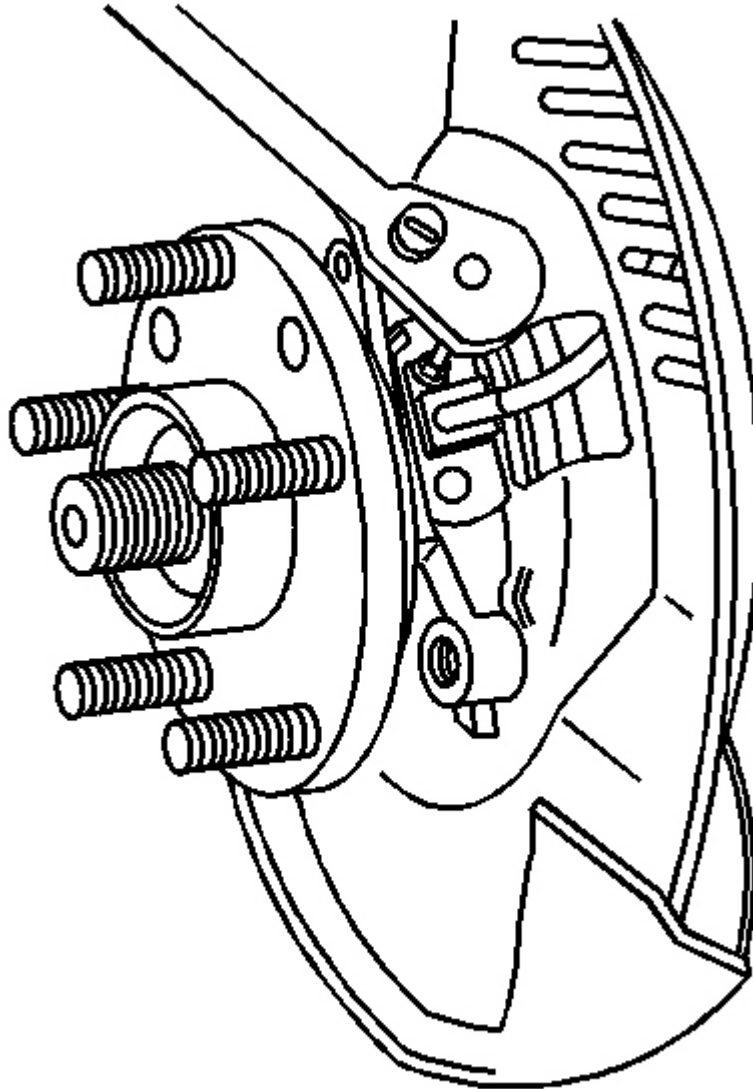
Disengaging Wheel Drive Shaft From Wheel Hub & Bearing
